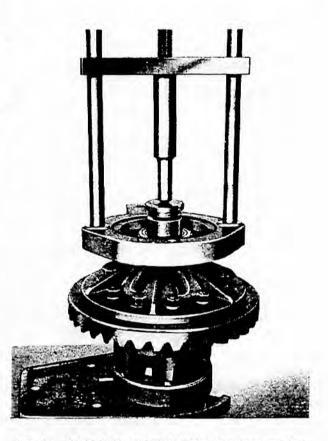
REMOVING DIFFERENTIAL BEARING CONES
